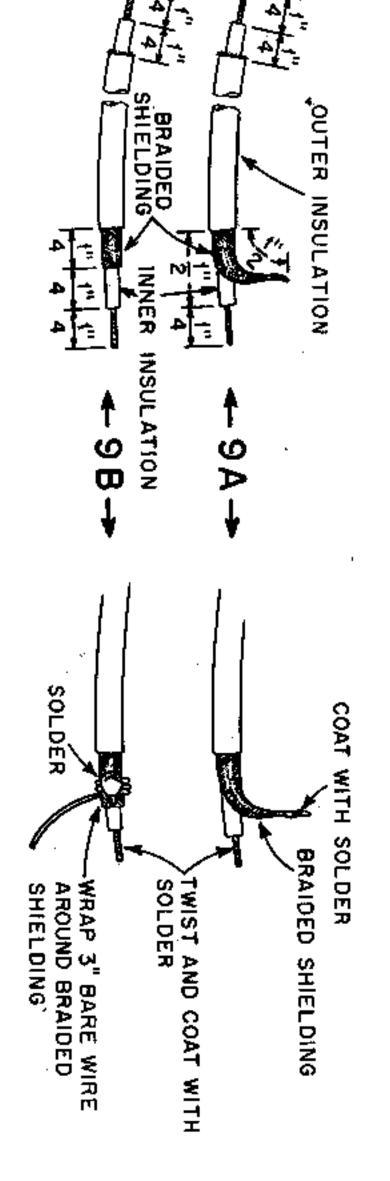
PREPARING INSULATED SHIELDED WIRES
